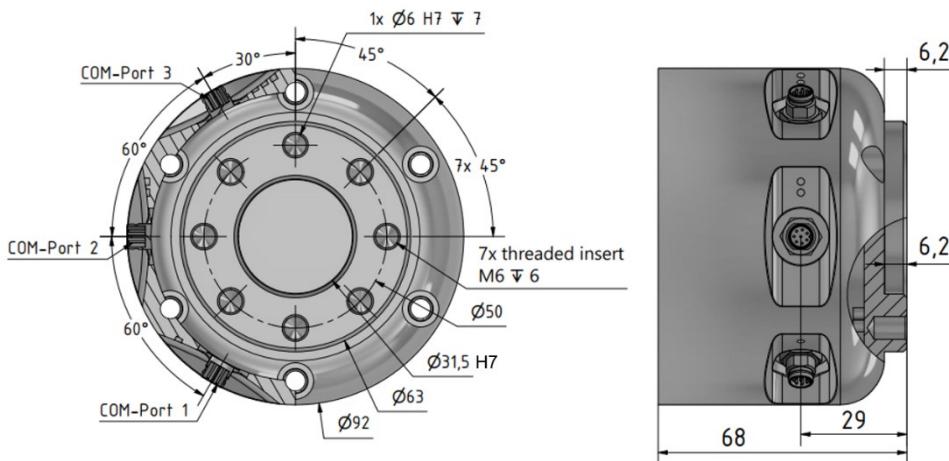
MAiRA tool flange (ISO 9409-1-50-7-M6) dimensions (all dimensions in mm)
